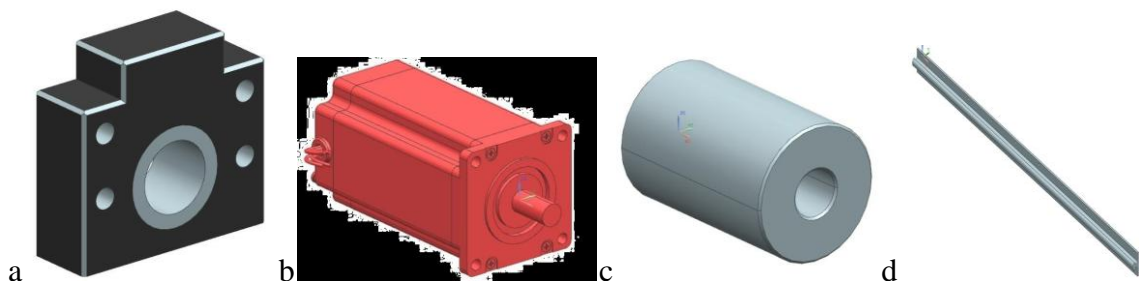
(a) Bearing Housing (b) Side Columns (c) Machine Head (d) Guide ways
